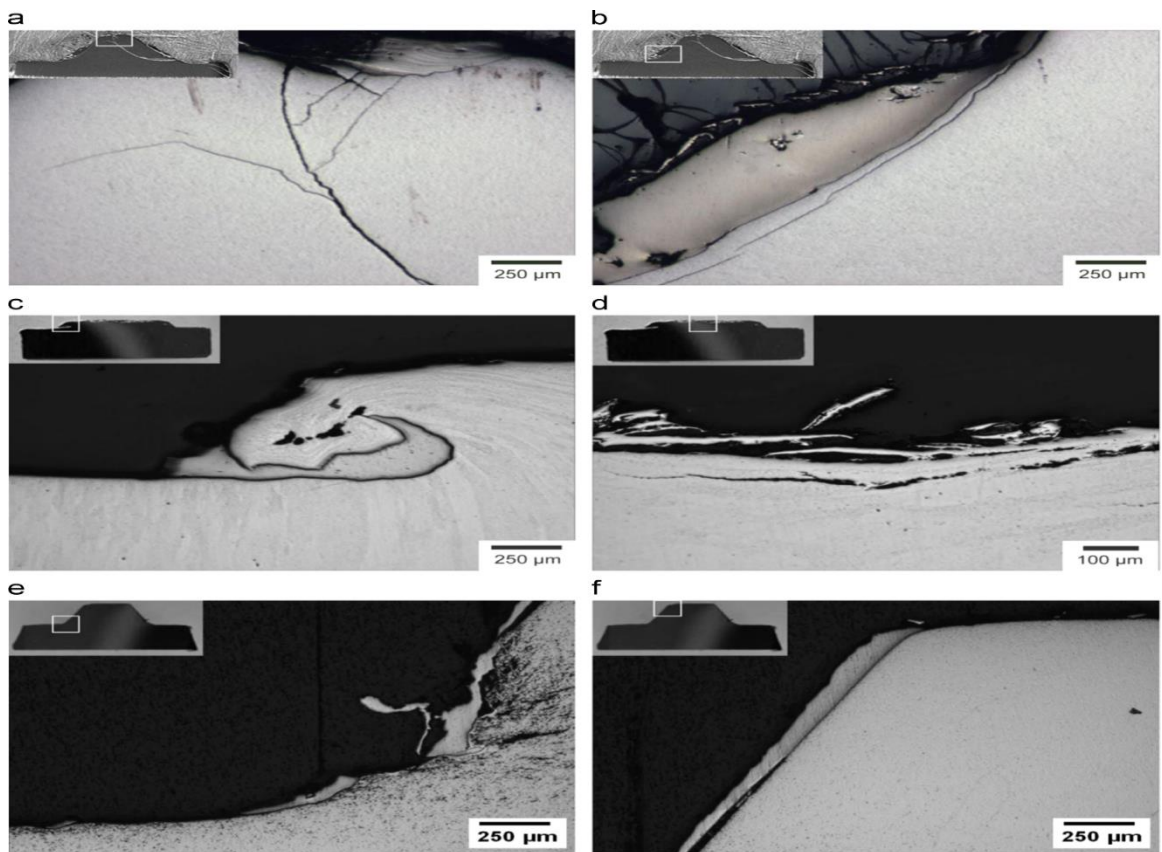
OM images of welded joints at different tool materials [214]
